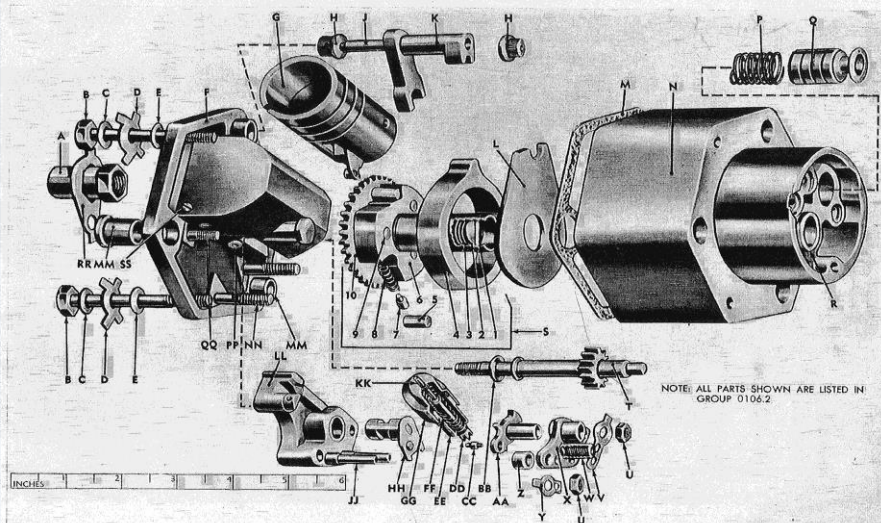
Engine automatic oil filter motor (B197556), exploded view.
